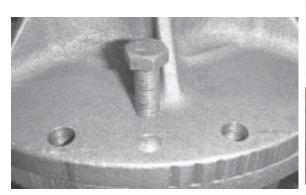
Pusher Screws Installed in Manifold; Removing Manifold
